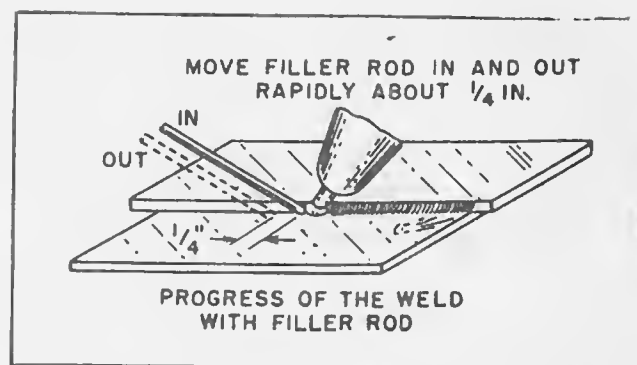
Progress of a Lap Weld with Filler Rod
